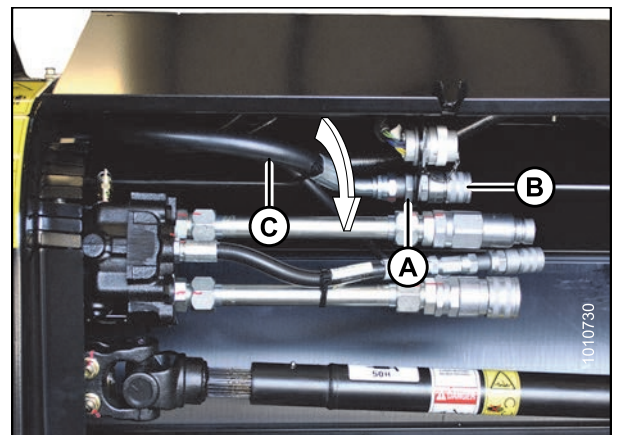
Auger and Reel Pressure Coupler and Hose – 18-Ft. Header Shown
